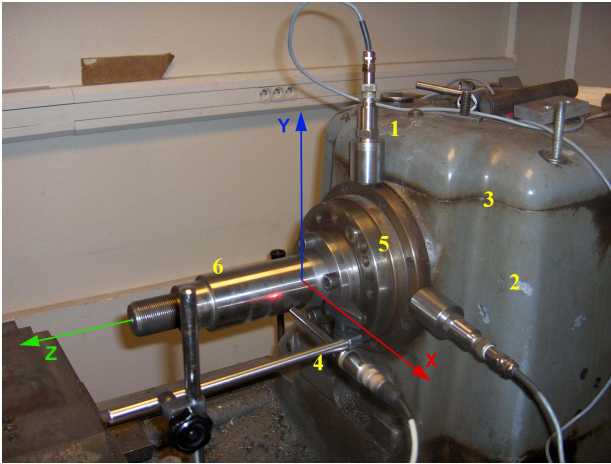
Position of transducers in acquisition schema to acquire vibrations of the spindle ERNAULT. 1- Accelerometer AS020 -vertical plan (V); 2- Accelerometer AS020 -horizontal plan (H), 3- Gearbox of Ernault HN400 lathe; 4- Tachometer; 5- Spindle bearing front side; 6- Workpiece.
